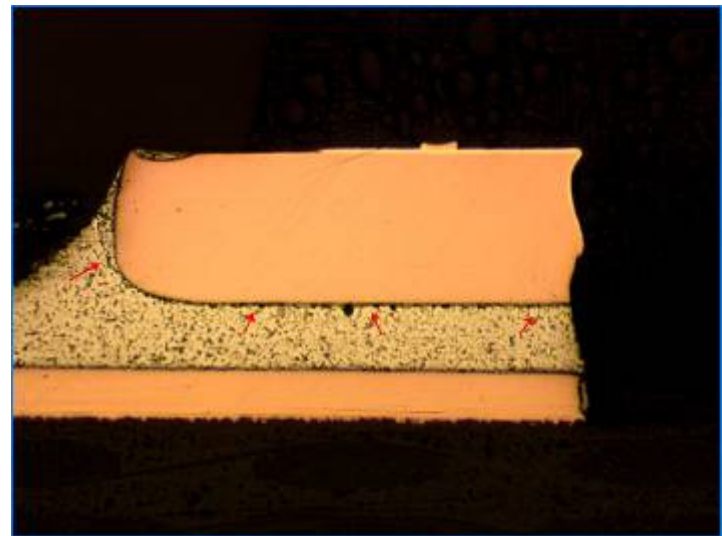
cross section, SN65, U54, left lead solder crack, 100x
